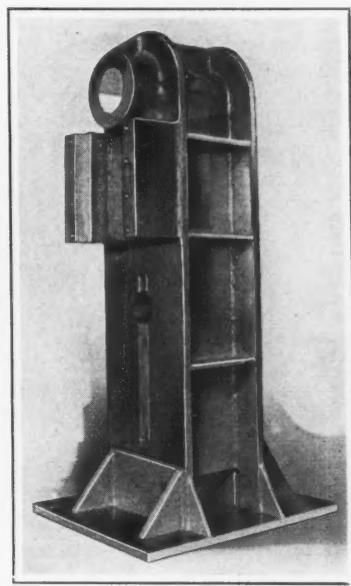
Arc-welded Steel Frame Built to Replace One of Cast Iron
